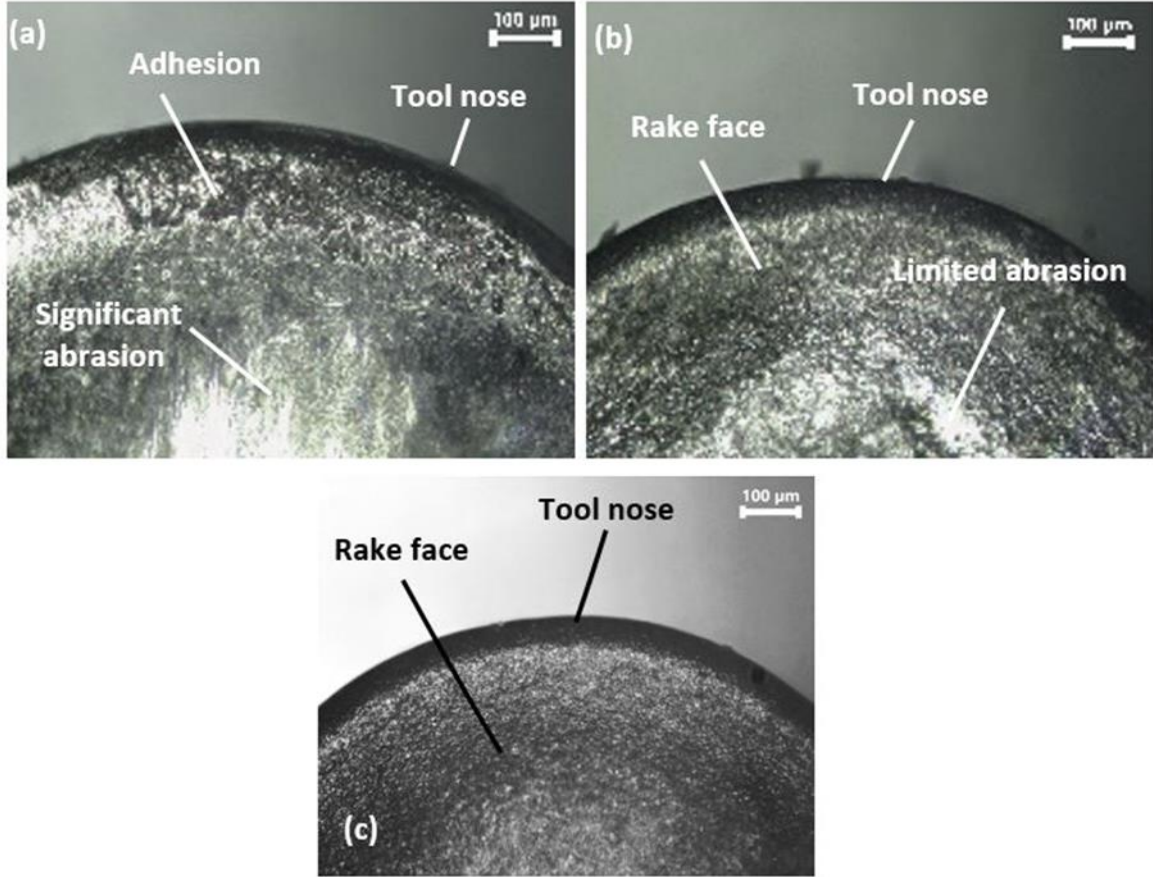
Tool wear for conventional tool (a) and wiper tool (b) at cutting speed of 1200 rpm, 0.1 feed rate and 0.25 mm depth of cut, while (c) fresh insert tool before the turning tests
